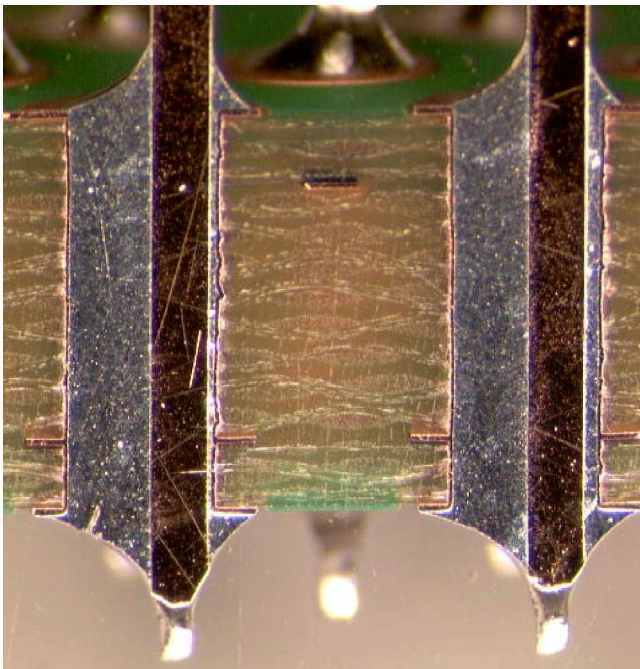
Solder Joint Formed at 280°C on the 50 Pin Metal Frame Connector
